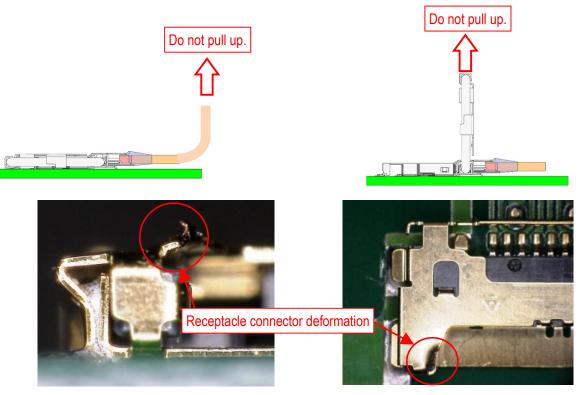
Prohibition of Harness and Lock Bar Assembly Handling
